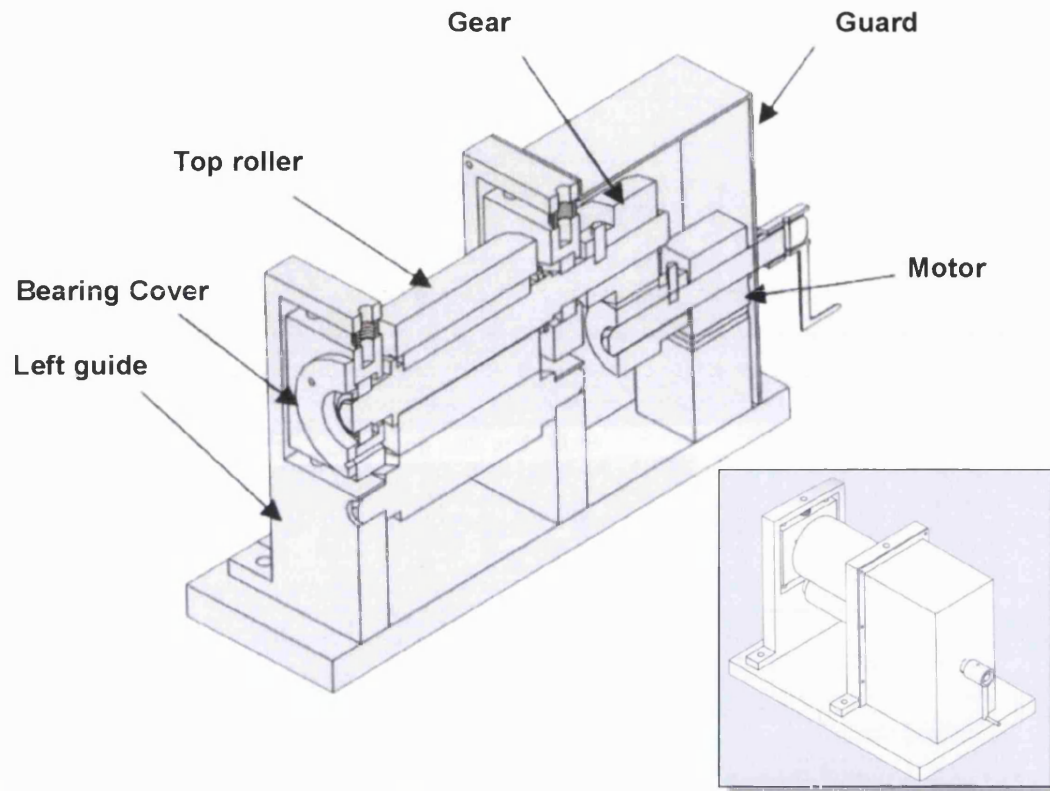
CAD drawing of the embossing machine and part description (Drawings from Escott)
